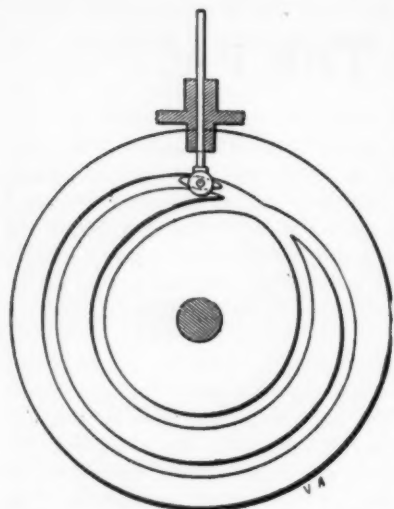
The predecessor of the exhaust valve cam and customary turning gears.
